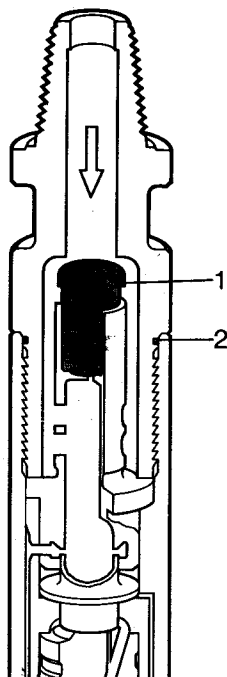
The check valve (1) and O-ring (2) must be without defect when drilling in water-bearing formations
